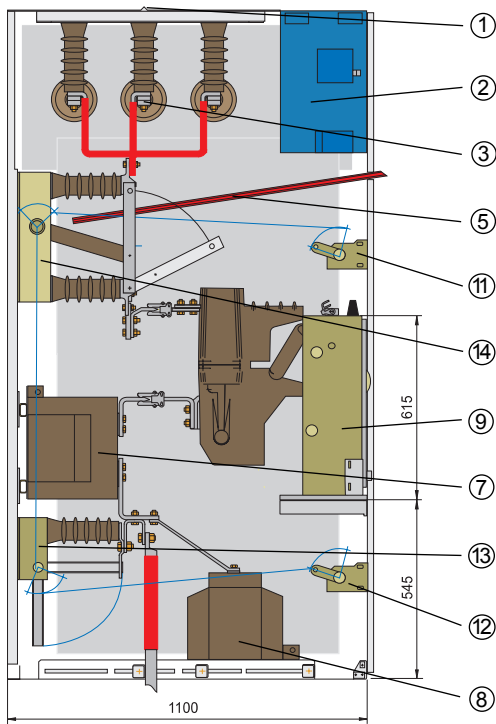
Circuit-breaker panel in mobile stationary-mounted design
